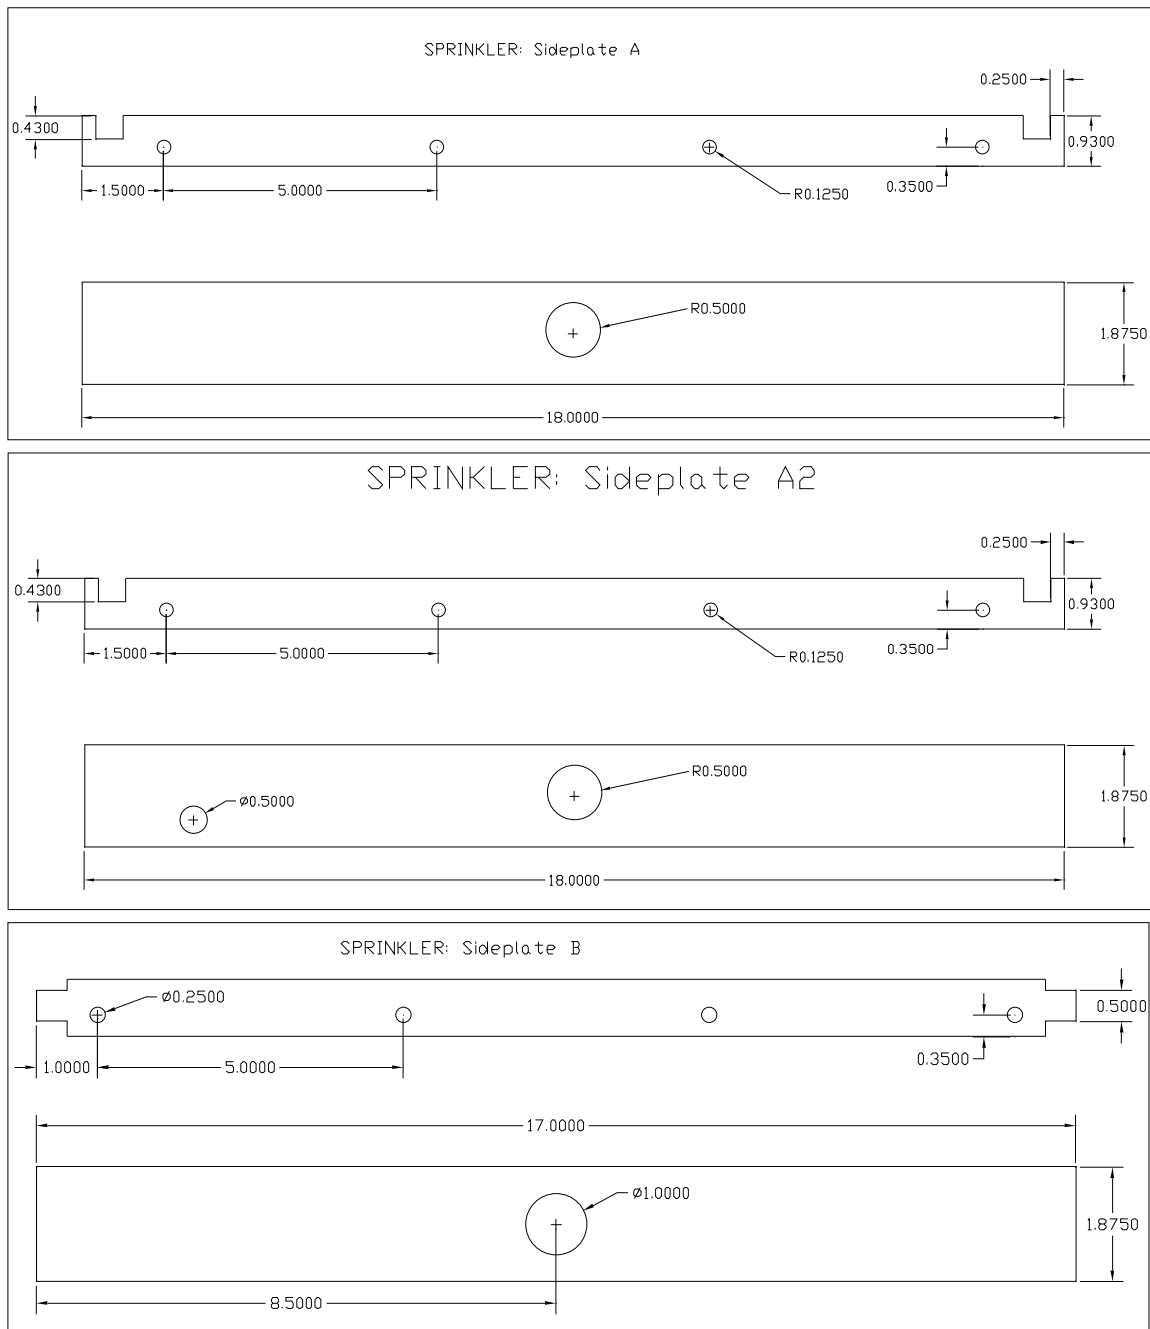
The sideplates of the Sprinkler. These pieces form the walls of the Sprinkler. They fit together by tongue-and-groove joints (similar to the box). They are bonded by Weld-on acrylic cement applied using capillary forces to wet the joint.
